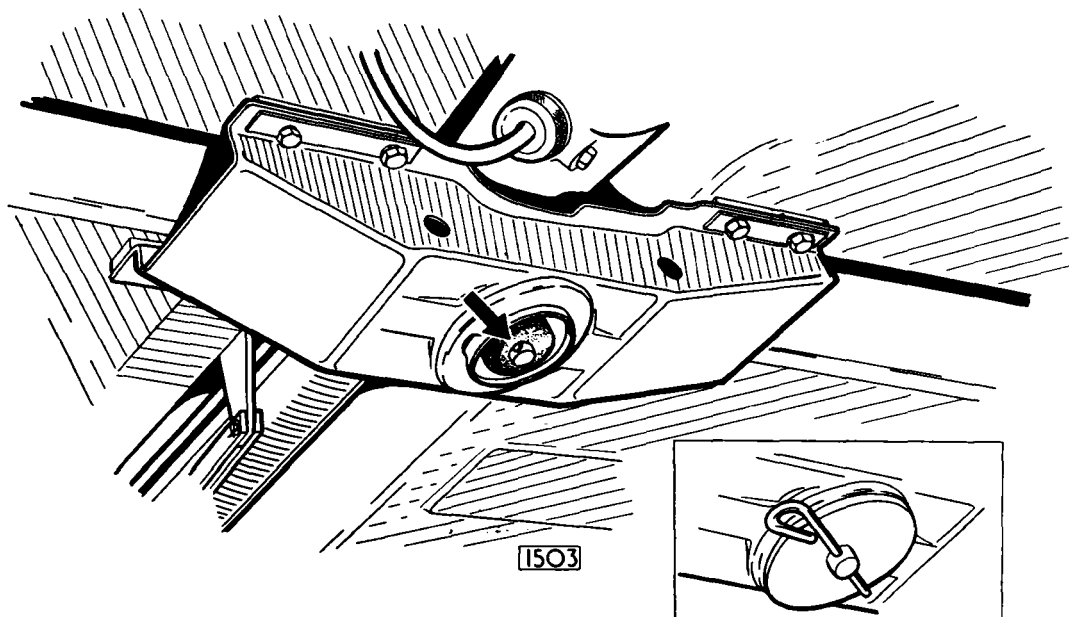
The hole at the bottom of the spring retainer stem is for assembly purposes only. The inset shows the large washer and rod in position prior to removal of the rear mounting.
